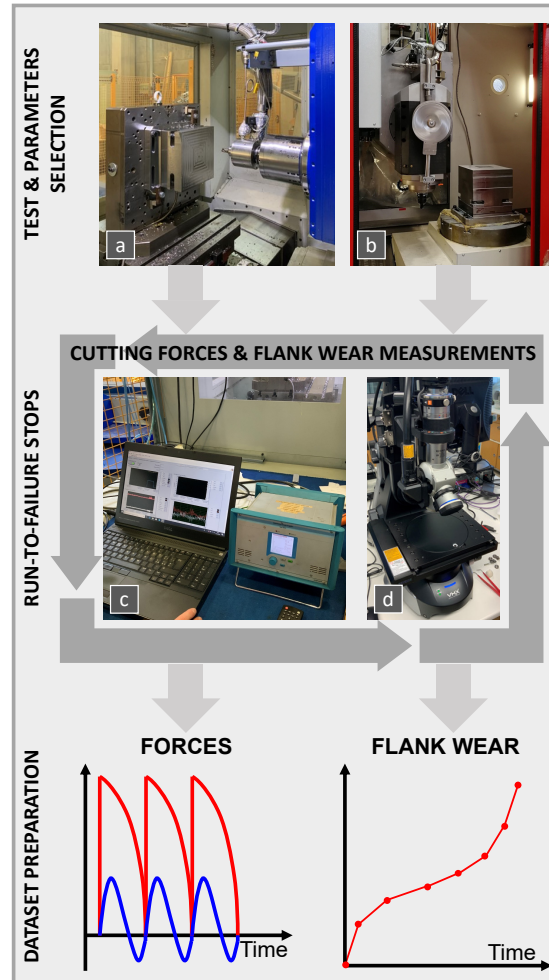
Experimental set-up: a) Mandelli M5, Mitsubishi mill, Kistler dynamometer and cryogenic set-up; b) Sigma Flexi FFG group, Mitsubishi mill, Kistler dynamometer and conventional cooling set-up; c) DAQ system; d) Keyence microscope. Run-to-failures are performed through stops, in order to assess the flank wear.
